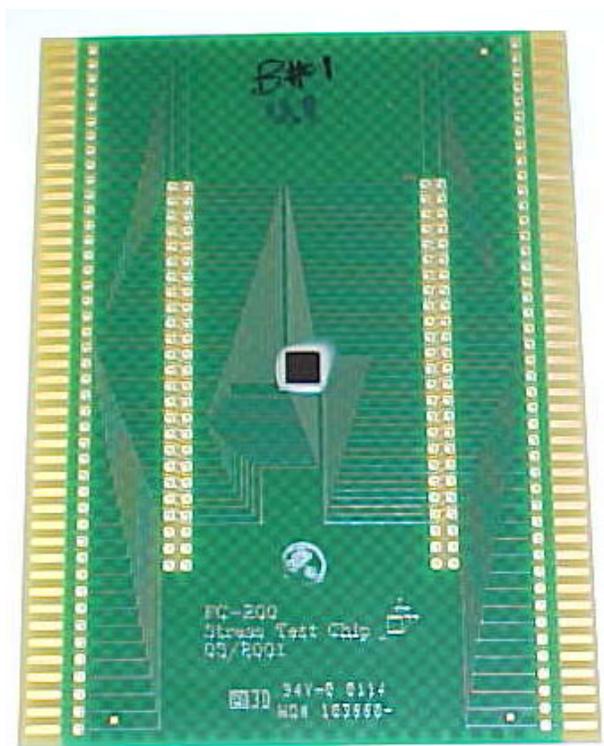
Photos of an Assembled Test Board and Test Chip
